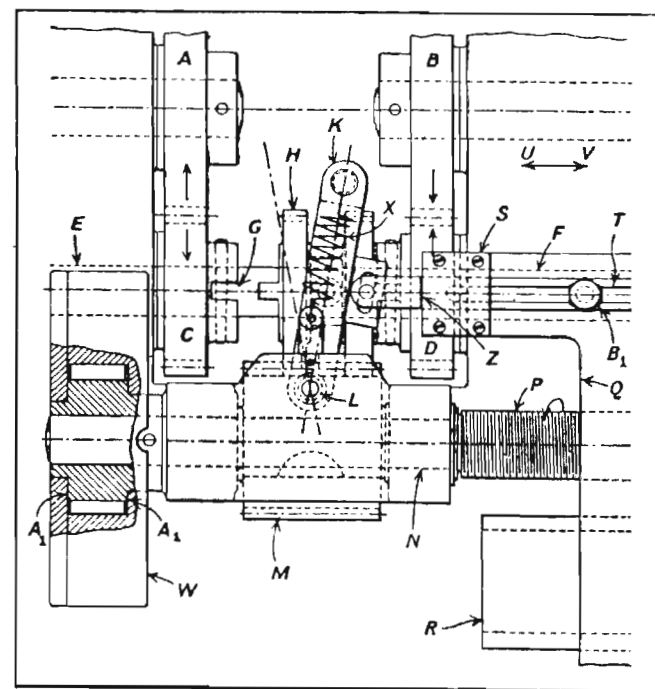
Reversing Mechanism for Cable-winding Machine.
